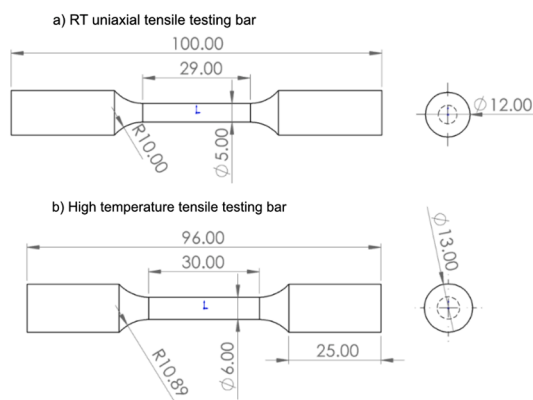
Two-dimensional sketch for final dimensions of a) uniaxial tensile testing bar and b) high-temperature tensile testing bar. Radius (R) represents the minimum value. All dimensions in mm. Machined samples follow specifications from ASTM E8 standard [35].
